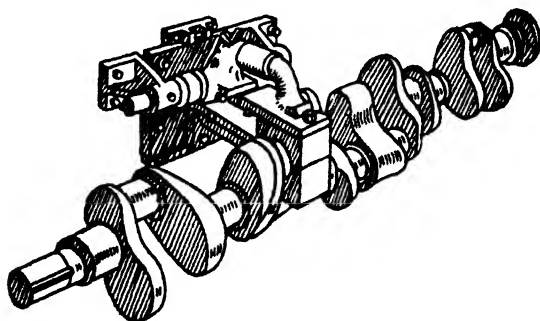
SHOWING THE TOCCO HARDENING UNIT APPLIED TO CRANKSHAFT JOURNAL
